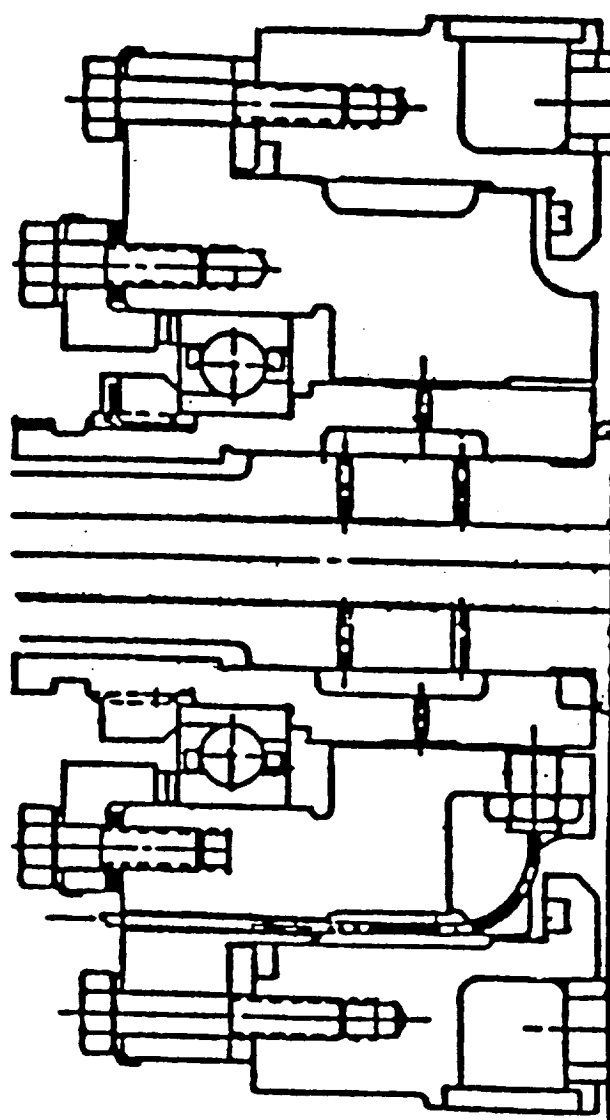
Long Life Bearing Tester with and internally fed hydrostatic bearing
